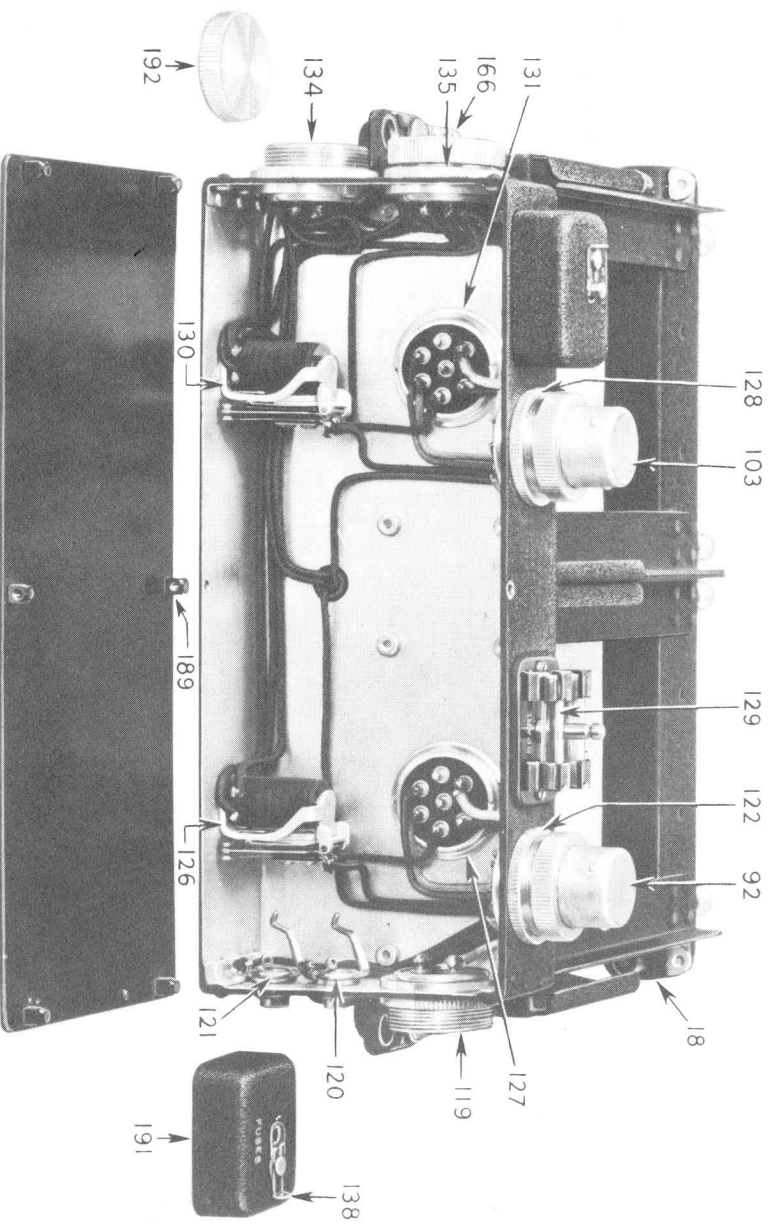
TYPE CBY-46096 RECEIVER RACK, REAR VIEW, WITH REAR COVER REMOVED
